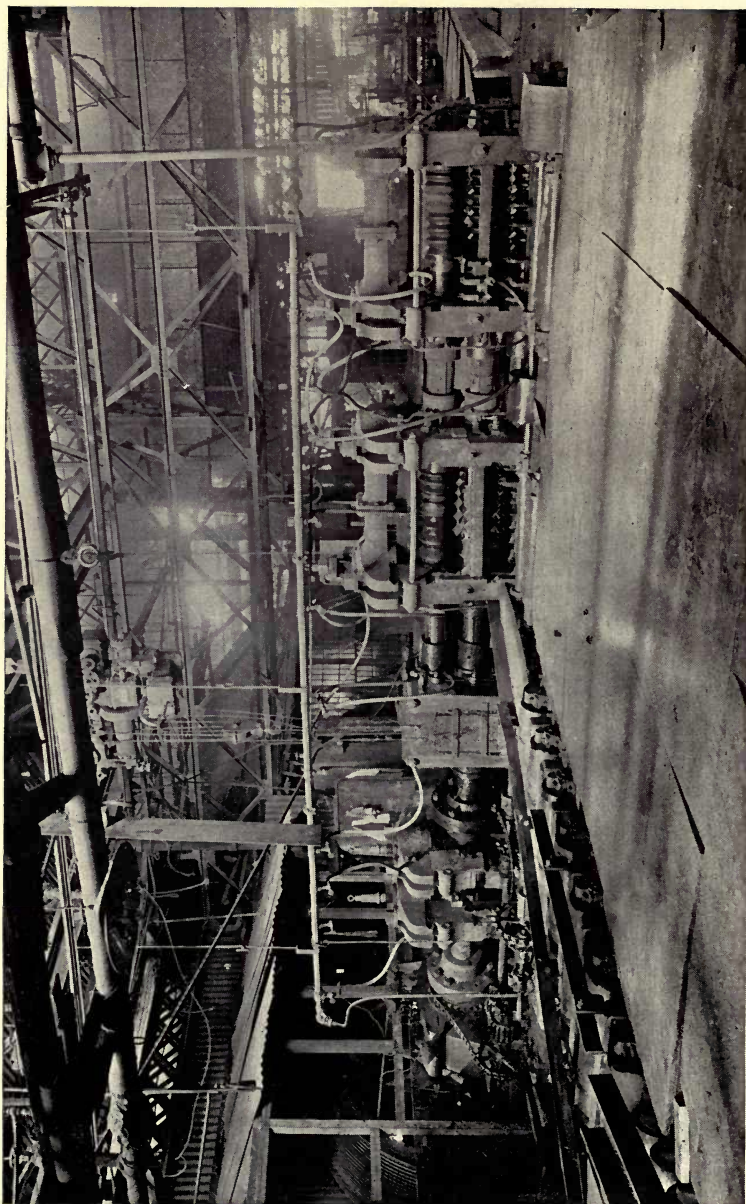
16-inch Merchant Mill, Illinois Steel Co., Milwaukee
